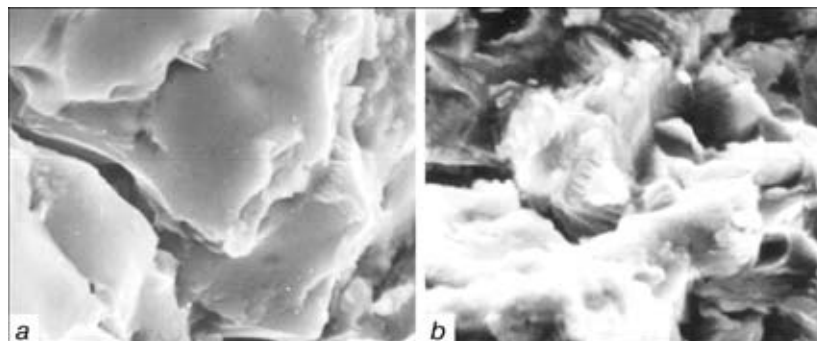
Surface of fracture of the metal on the boundary of fusion of arc-welded joints: *a* — 1421 alloy; *b* — 1460 alloy (×500)
